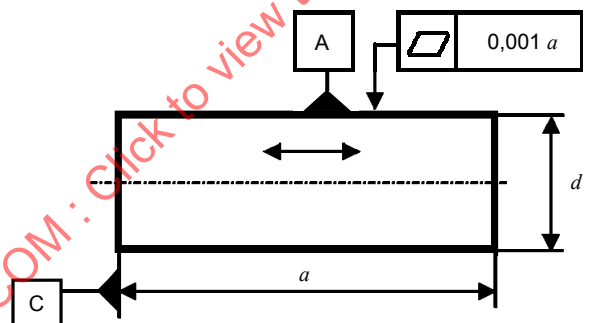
Lamination strips Type YS, dimensions and tolerances
